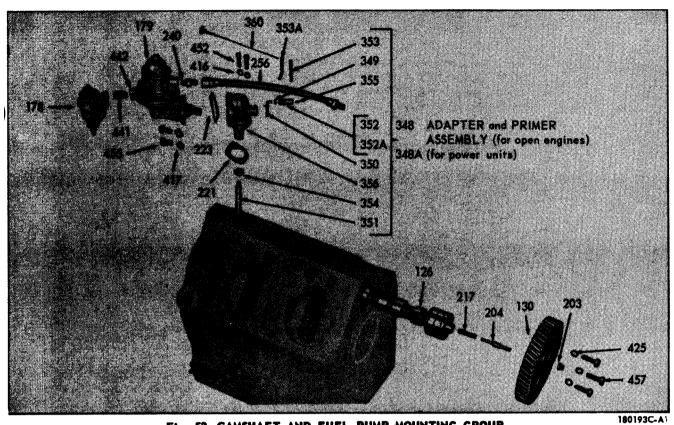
, CAMSHAFT AND FUEL PUMP MOUNTING GROUP
